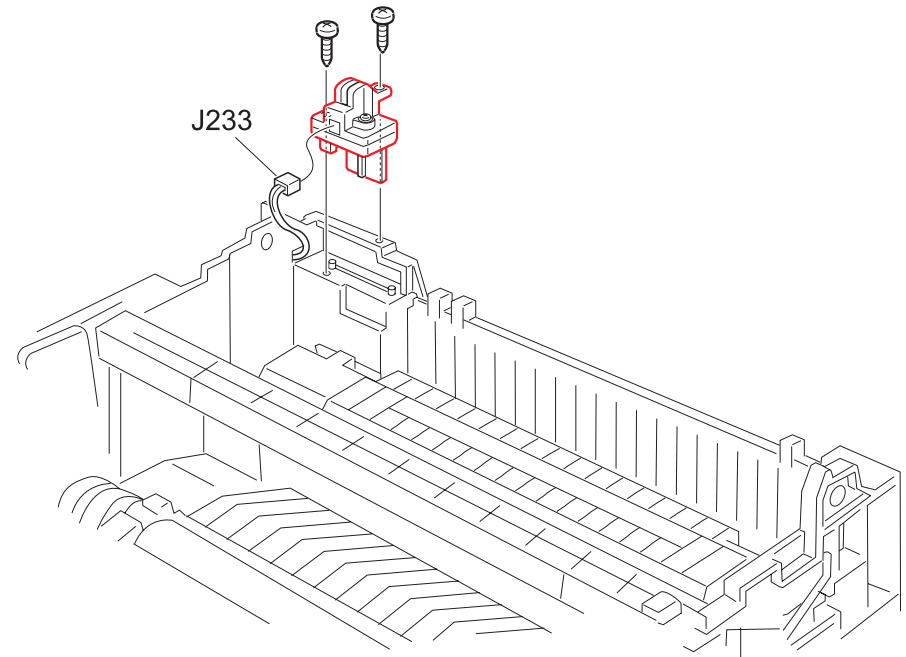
"Switch Assembly 5V Interlock" Removal
